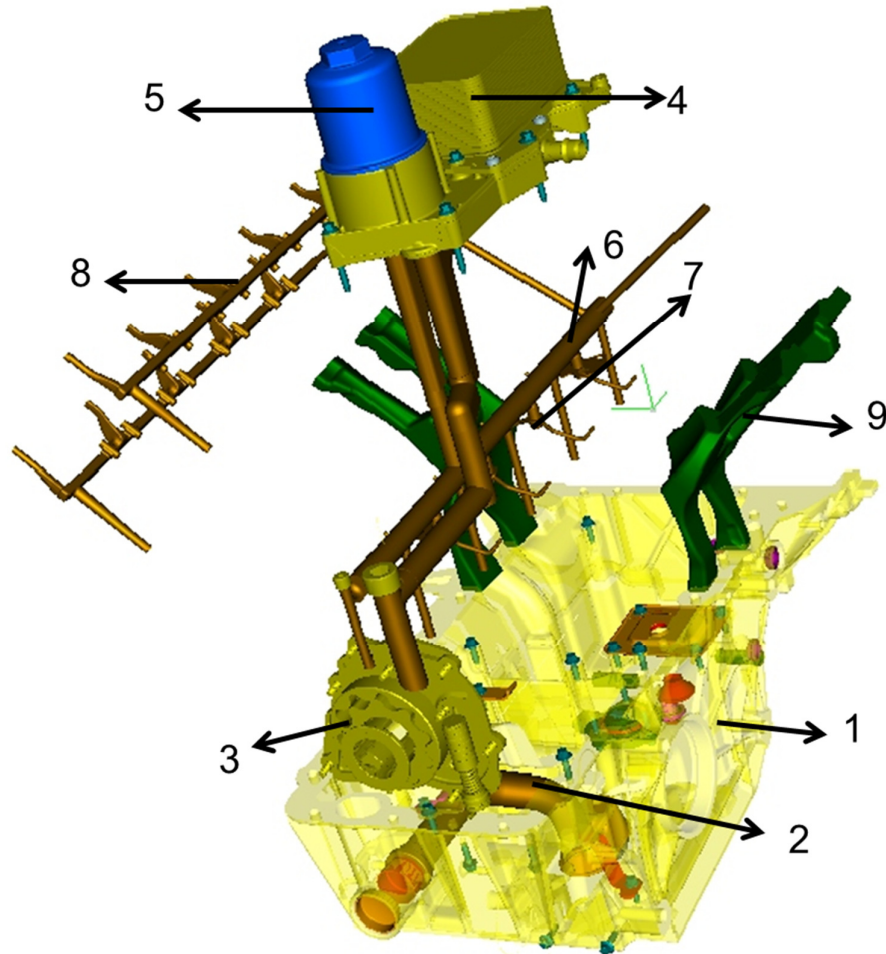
V8 engine lubrication system schematic. 1- structural oil sump, 2- suction pipe, 3- rotor type oil pump, 4- oil cooler, 5- oil filter, 6- main oil gallery, 7- PCJ, 8- cam oil gallery, 9- oil return channels [5].
